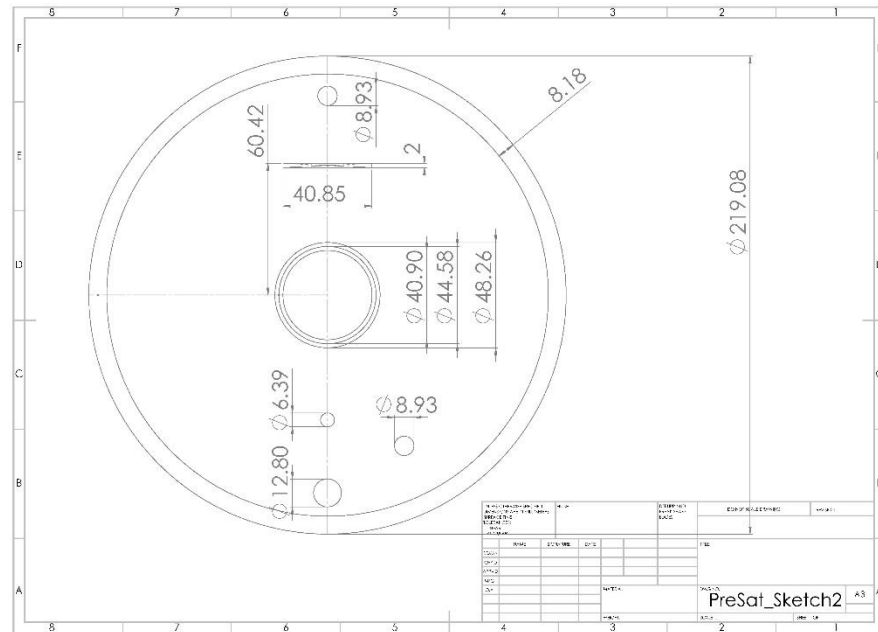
Top view of pre-saturator with dimensions in millimetres.
